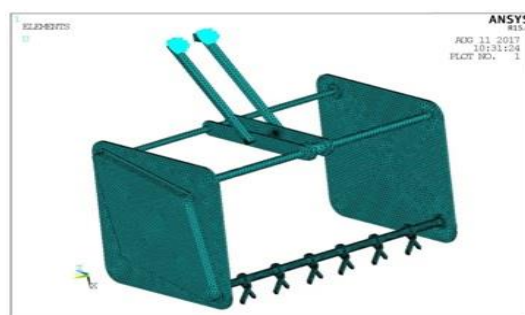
Shows the boundary conditions on modified tillage equipment assembly
